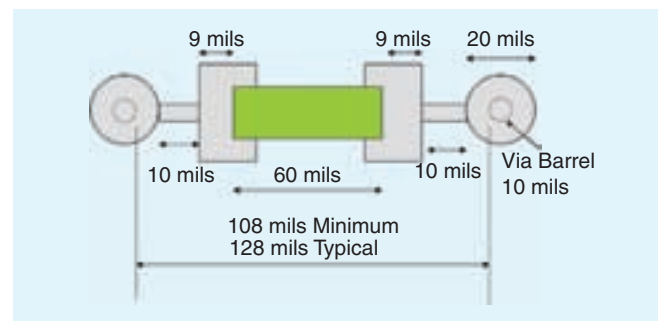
Typical Minimum 0603 Capacitor Mounting Dimensions
